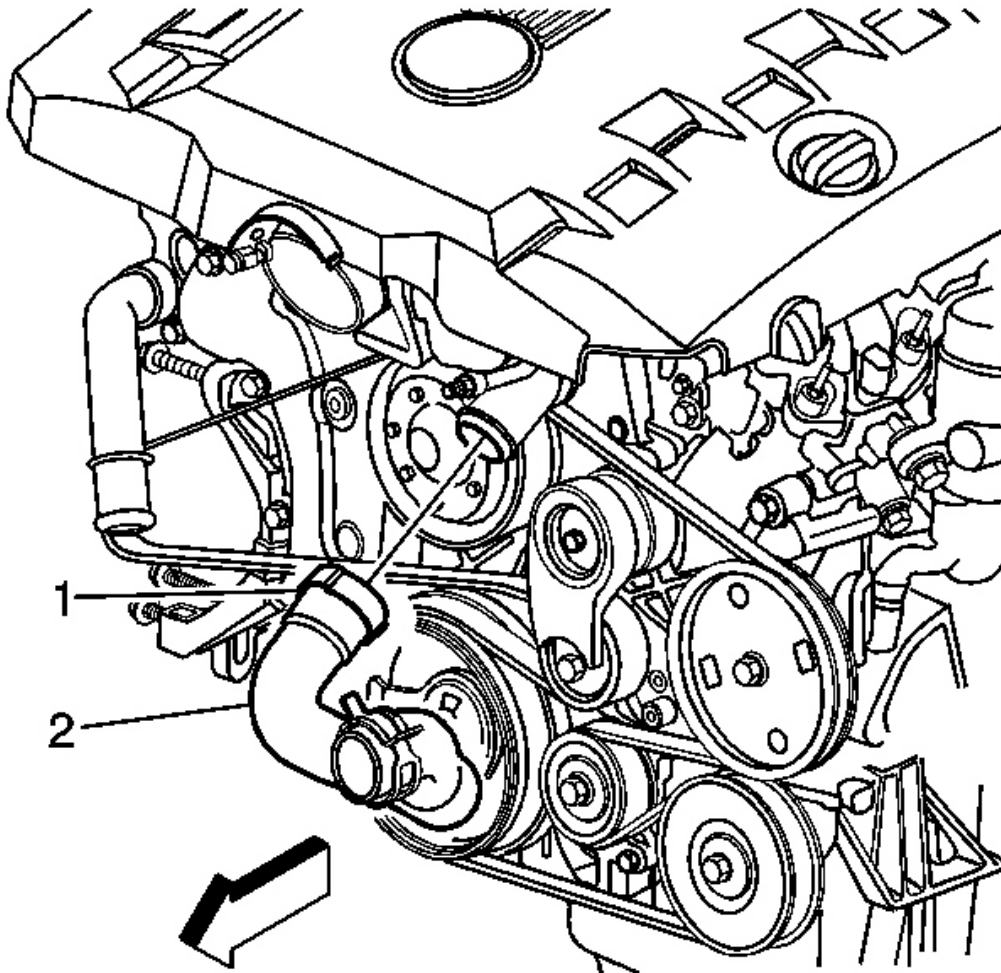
Radiator Inlet Hose & Clamp At Engine
